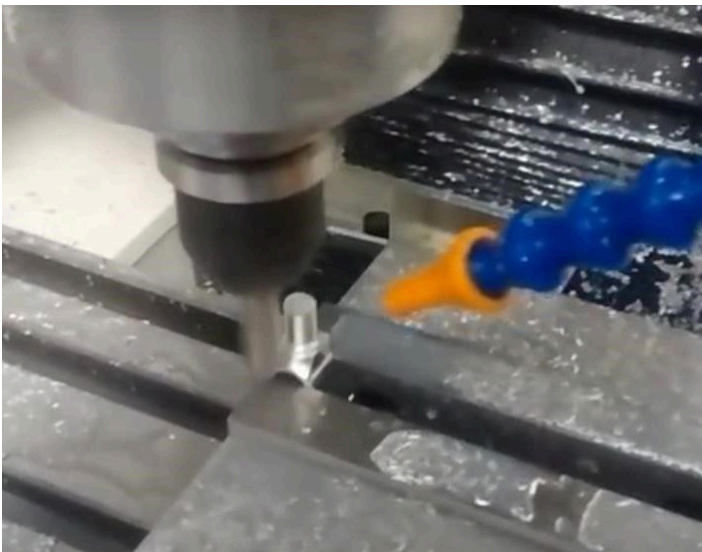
CUTTING PARTS ON THE TORMACH.
